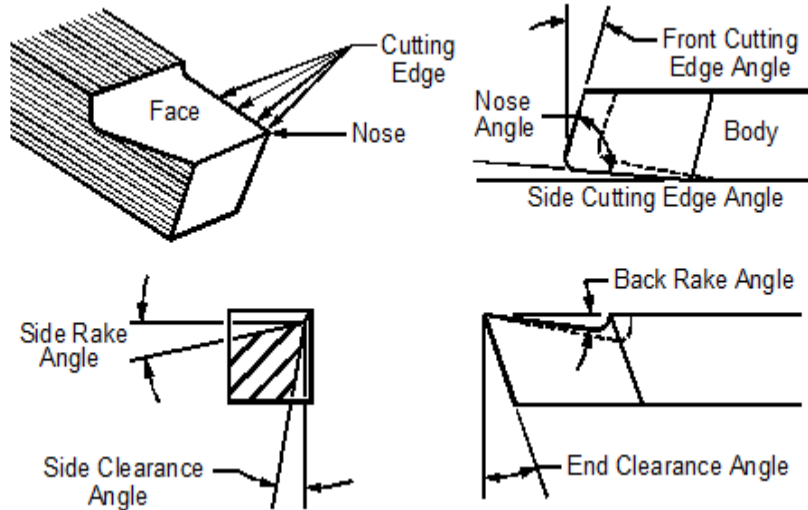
Typical rake and clearance (relief) angles for HSS tool bits
